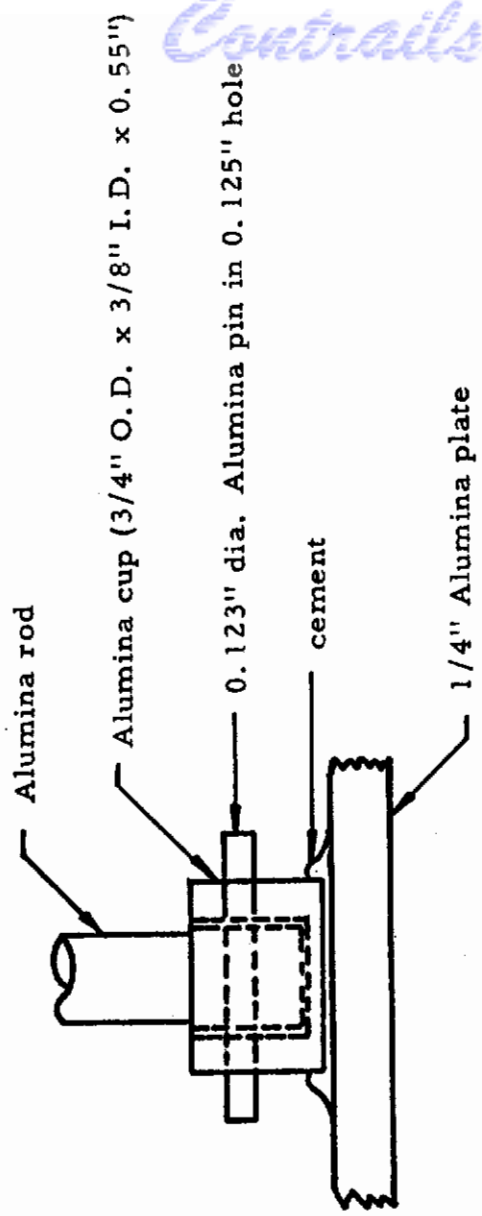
DETAILS OF ALUMINA PLATE/ALUMINA ROD ATTACHMENT
